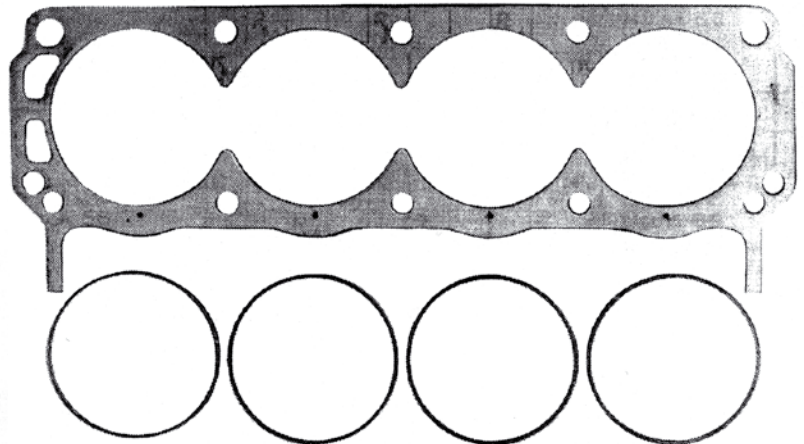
This new cylinder head gasket has metallic O-rings with a periphery mattress.
